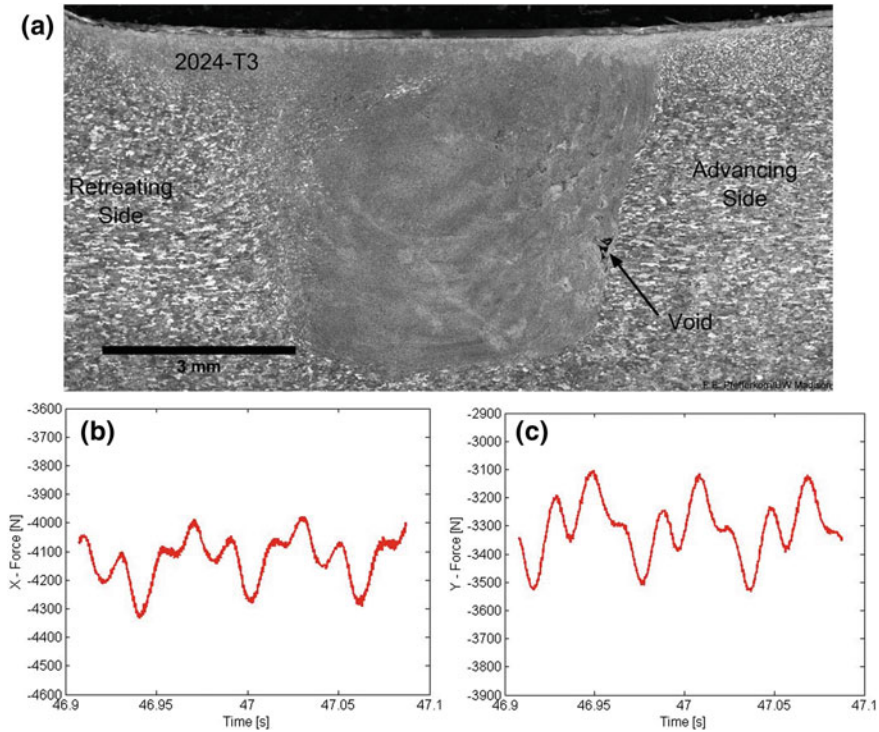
Results of weld at 1,000 rpm and 600 mm/min in alloy 2024-T3: a cross section of weld, b force signal perpendicular to welding direction, c force signal in direction of welding
